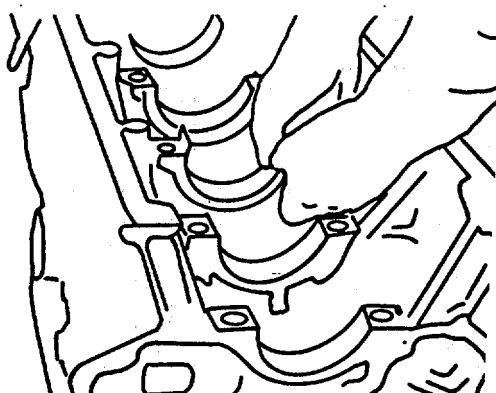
Removing Sleeve Bearing Half Sets.
